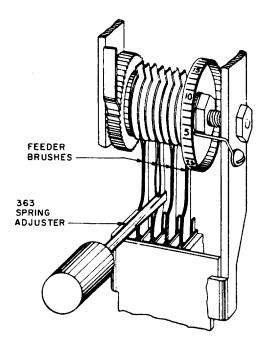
Method of Adjusting for Feeder Brush Closure
